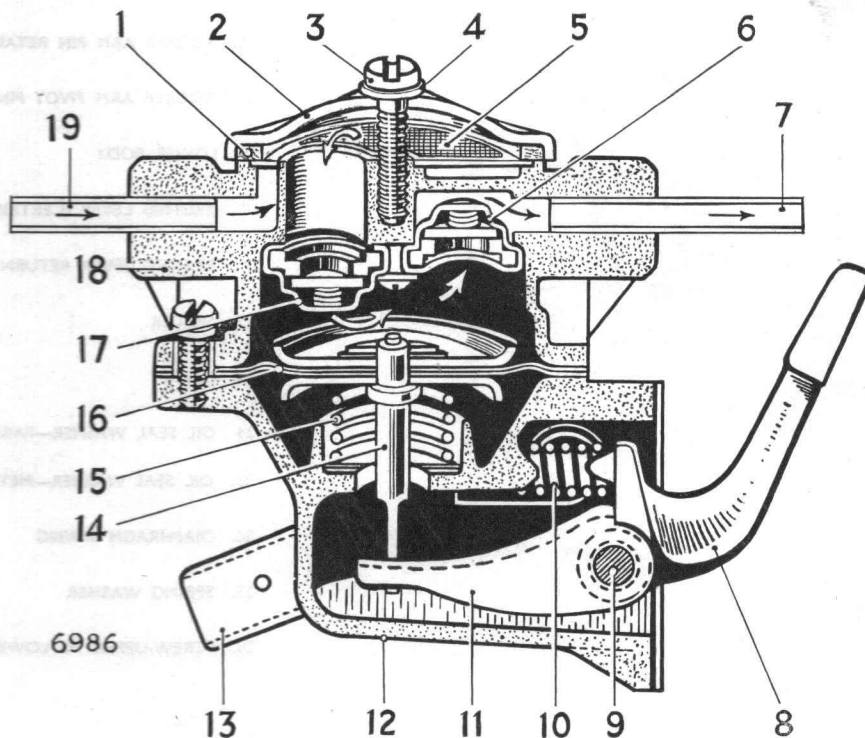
Sectional view through fuel pump and filter (some pumps not fitted with priming lever)
